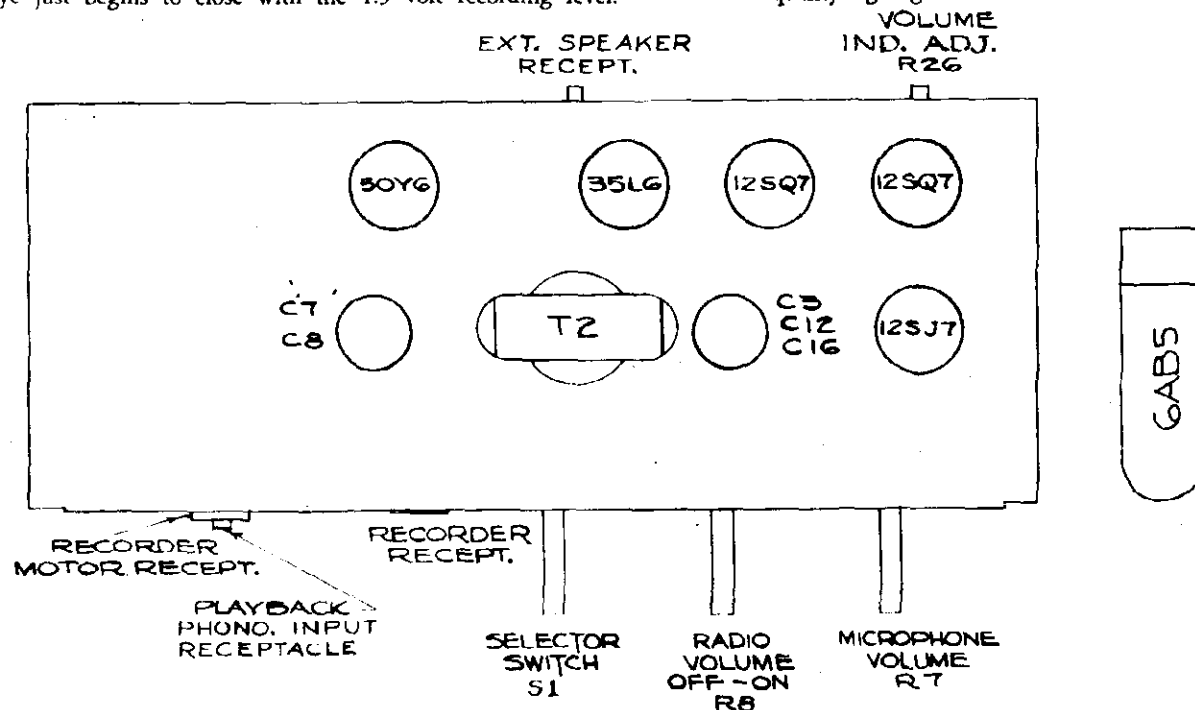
TUBE LOCATION AND PARTS LAYOUT
